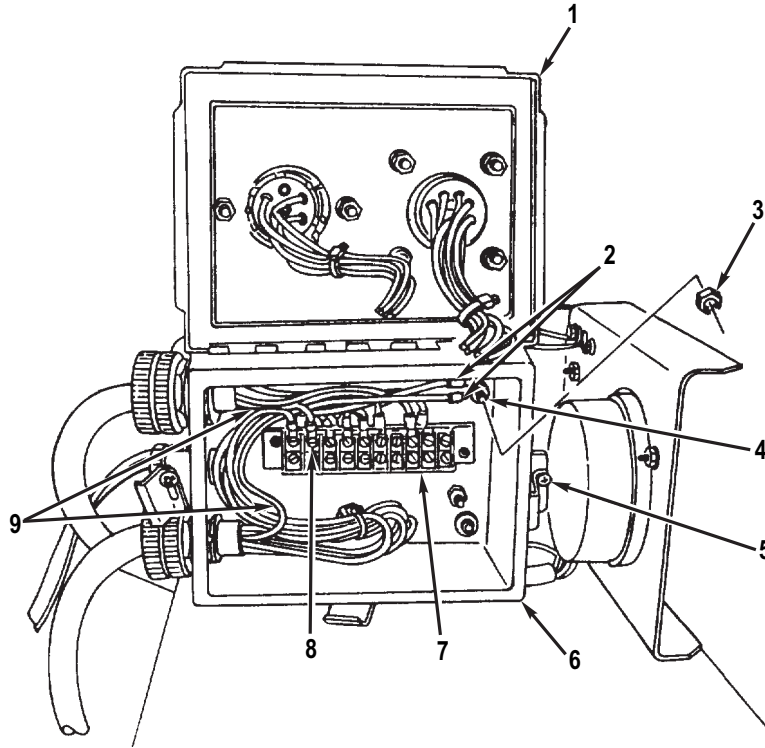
Rear Dolly Taillight Assembly Cable Assembly Installation.
